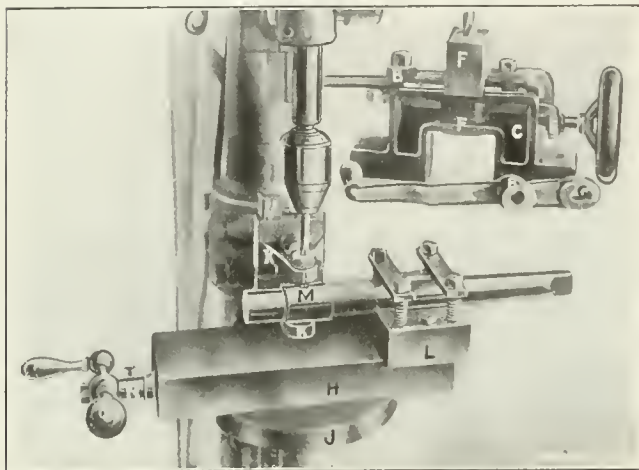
Two Fixtures used for Cutting Elongated Holes
